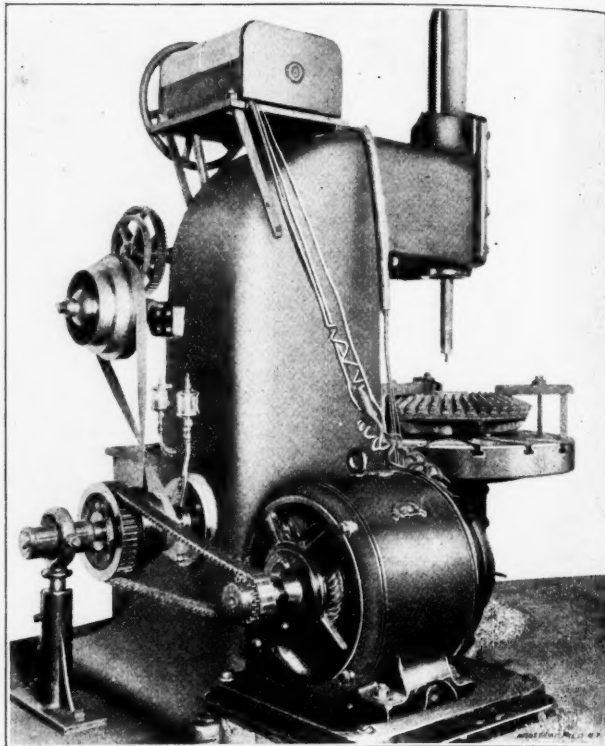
Betts Car-wheel Mill, Motor-driven, Renold Chain Drive.
